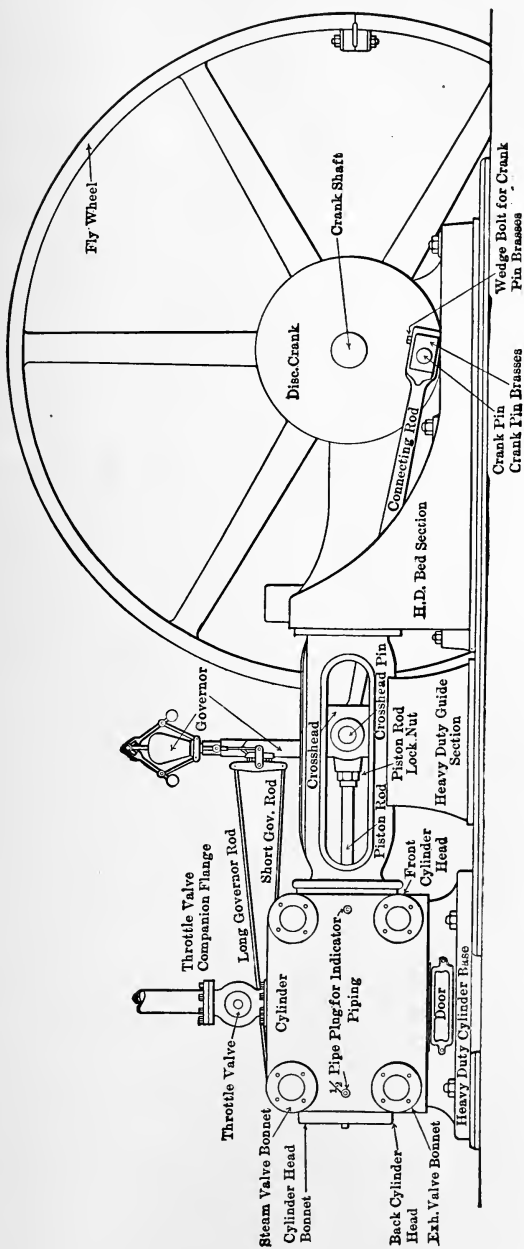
Side Elevation of a Typical Corliss Engine, Single Cylinder, Belt Drive.
